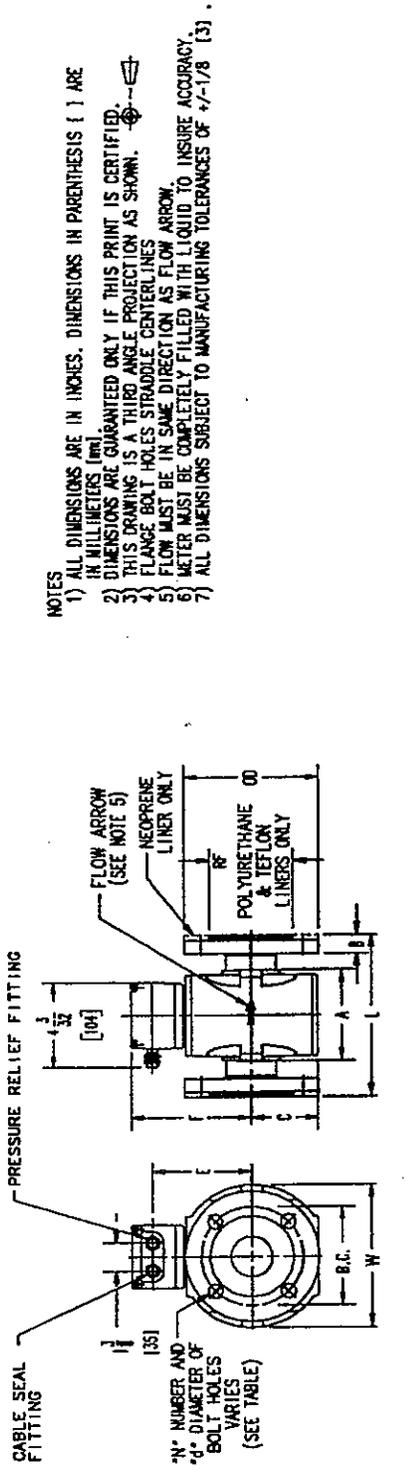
OUTLINE DIMENSIONS, REMOTE HI-TEMP FLOWMETER WITH ANSI FLANGES
